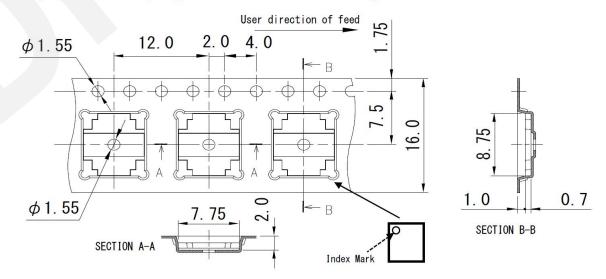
all-FBGA Embossed Carrier tape Dimensions (Unit: mm)
